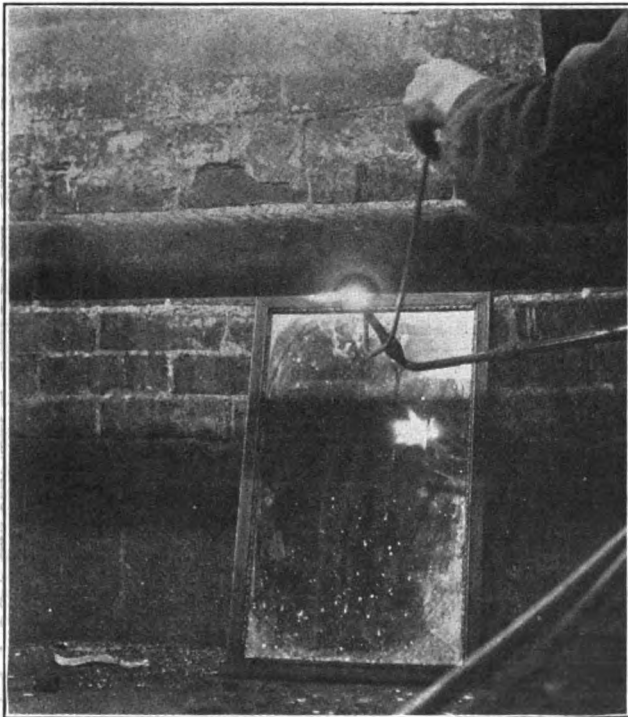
, Welding in close quarters with the aid of a mirror.
